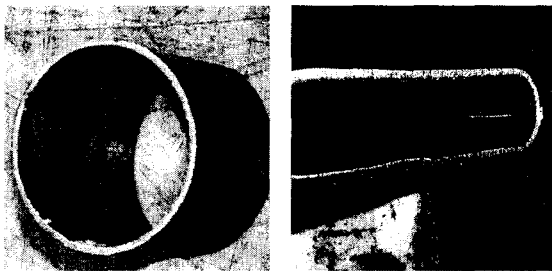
(b) The section A of the bend tube and the hydroformed tube
